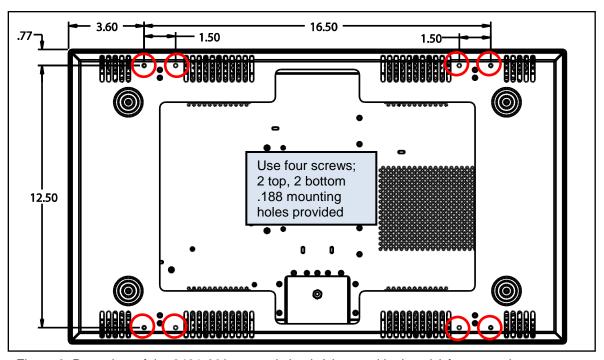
Rear view of the 2401-800 cosmetic back (shown with chassis) for a proud mount
